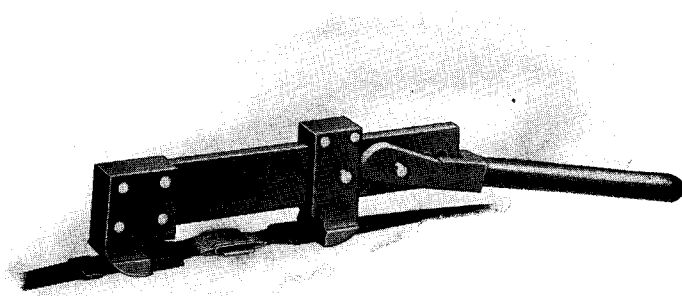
TOOL FOR ASSEMBLING SECTIONAL BAND, CLOSED POSITION
